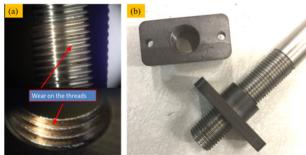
(a) Optical inspection images of the threads of the tuner after the cold test; (b) Photography of the fabricated TECASINT insert.
